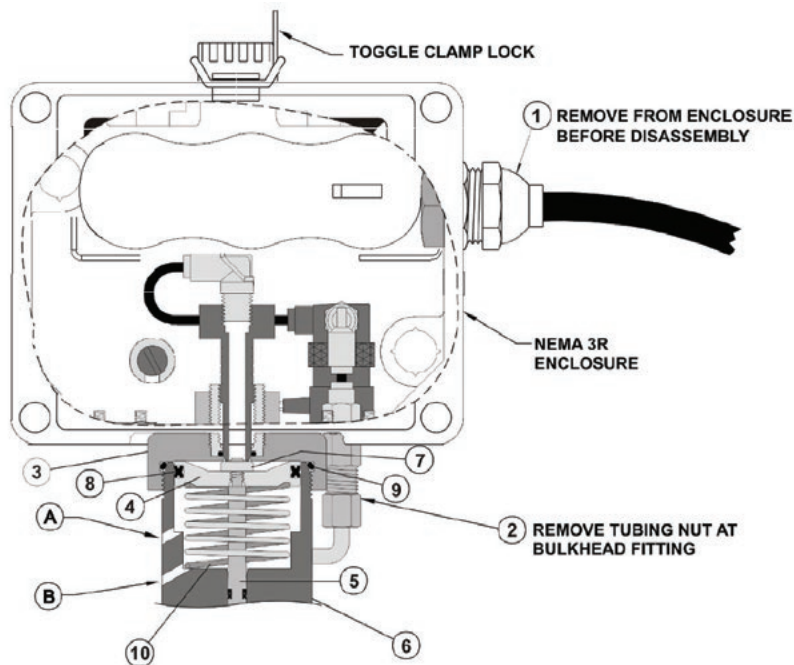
Inspection of Actuator and Pump Rod Seals or Bite Adjustment Screw
